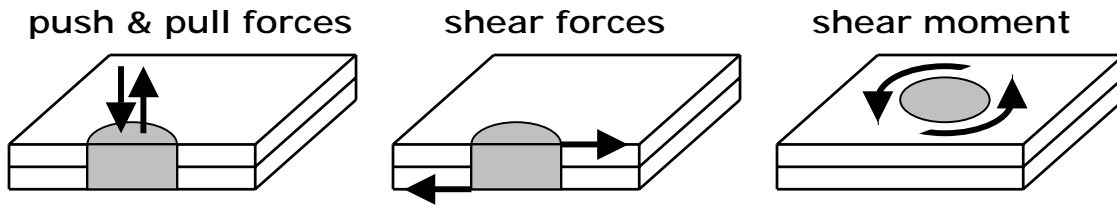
Forces and moments that can be transmitted by a spot weld.
